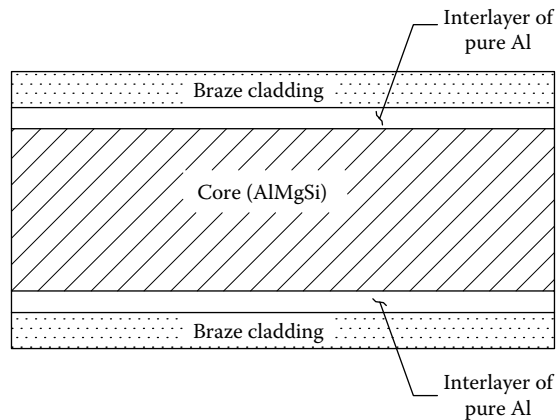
Multilayer clad aluminum brazing sheet.
